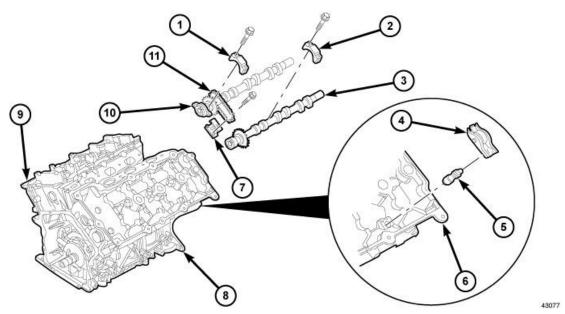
Camshaft & Valvetrain Components Courtesy of CHRYSLER LLC
